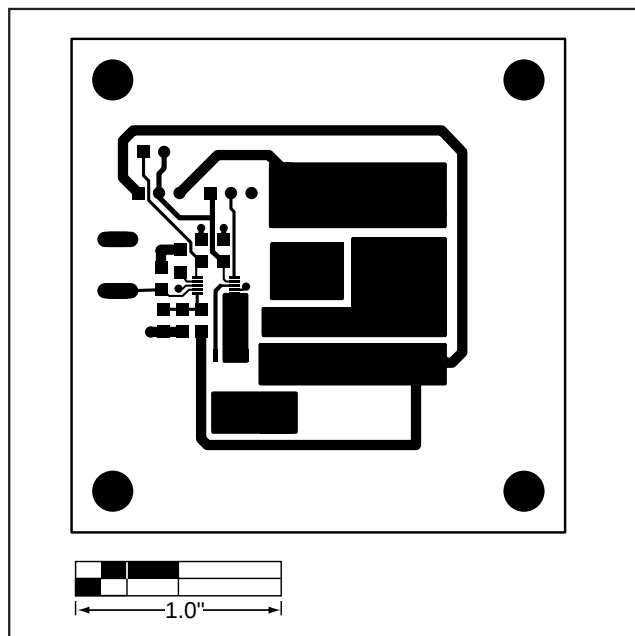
MAX668 EV Kit PC Board Layout—Component Side
